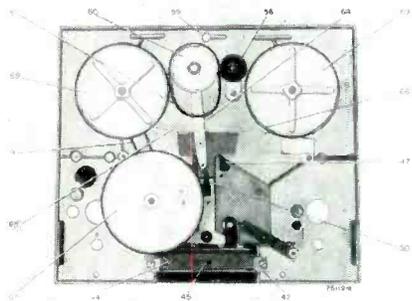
Bottom view of tape recorder showing flywheel, brake drum and shaft, idler lever assembly, idler tension spring, take-up reel drive belt, sub idler rubber tire pulley, etc.
